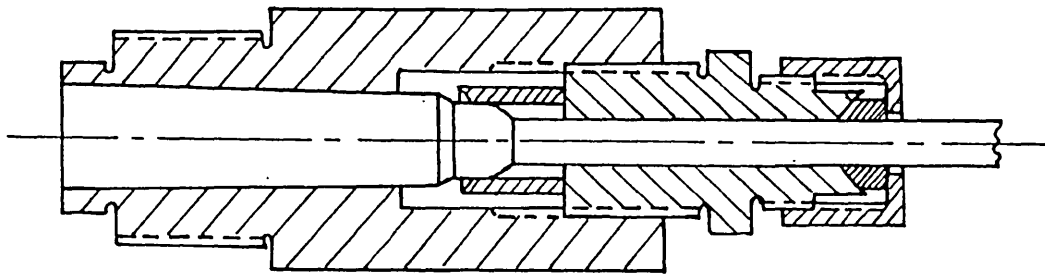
Mounting Adaptor for Thermocouple Sensor
